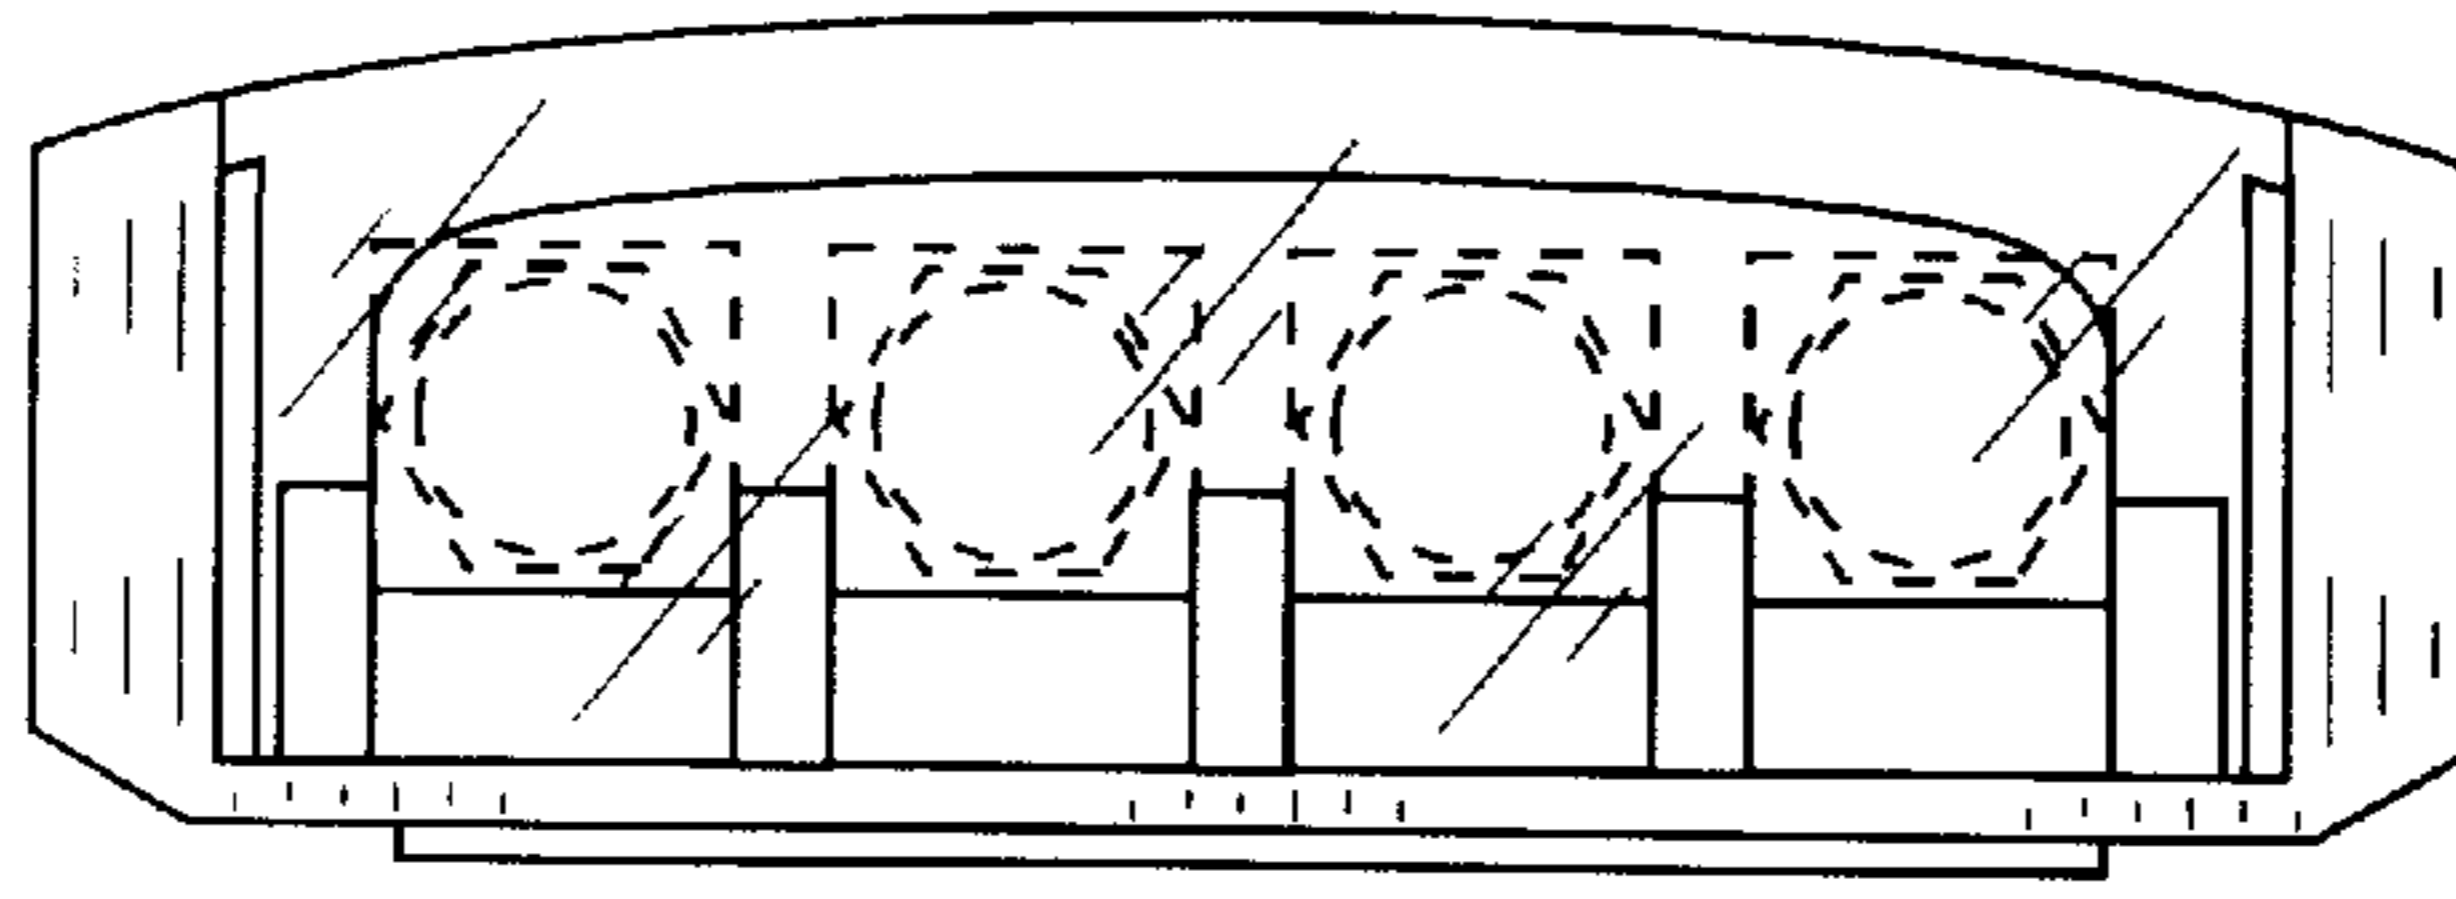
is a front perspective view of an enclosure cover and base for use with AGU fuse blocks, showing my new design. FIG. 2 is a top plan view of FIG. 1; FIG. 3 is a front side elevation view of FIG. 1; FIG. 4 is a rear side elevation view of FIG. 1; FIG. 5 is a bottom plan view of FIG. 1; FIG. 6 is a left side elevation view of FIG. 5; and, FIG. 7 is a right side elevation view of FIG. 5.
